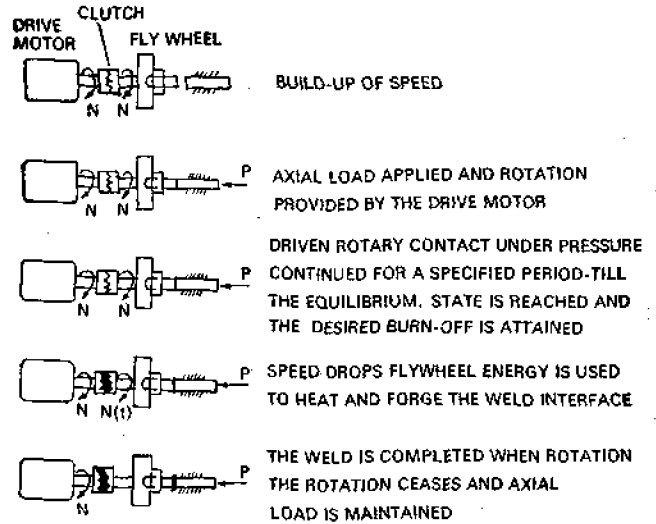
Heat Under Power (HUP) method of friction welding.
